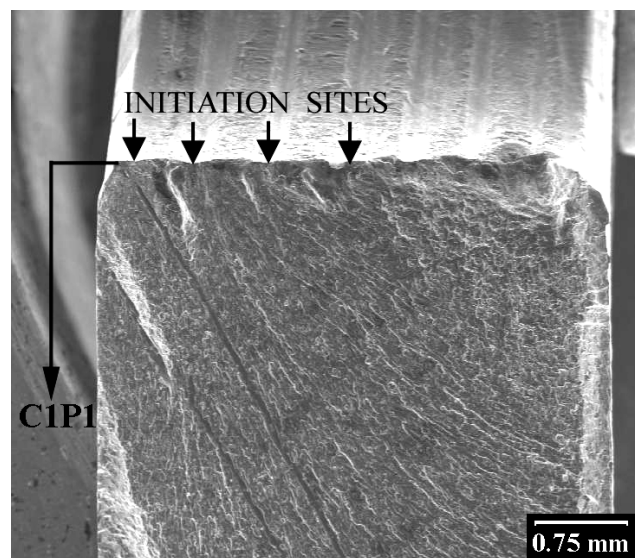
Multiple initiation of fatigue cracks C1P1 and C1P2 on rivet hole in lower flange plate of the wing spar.
